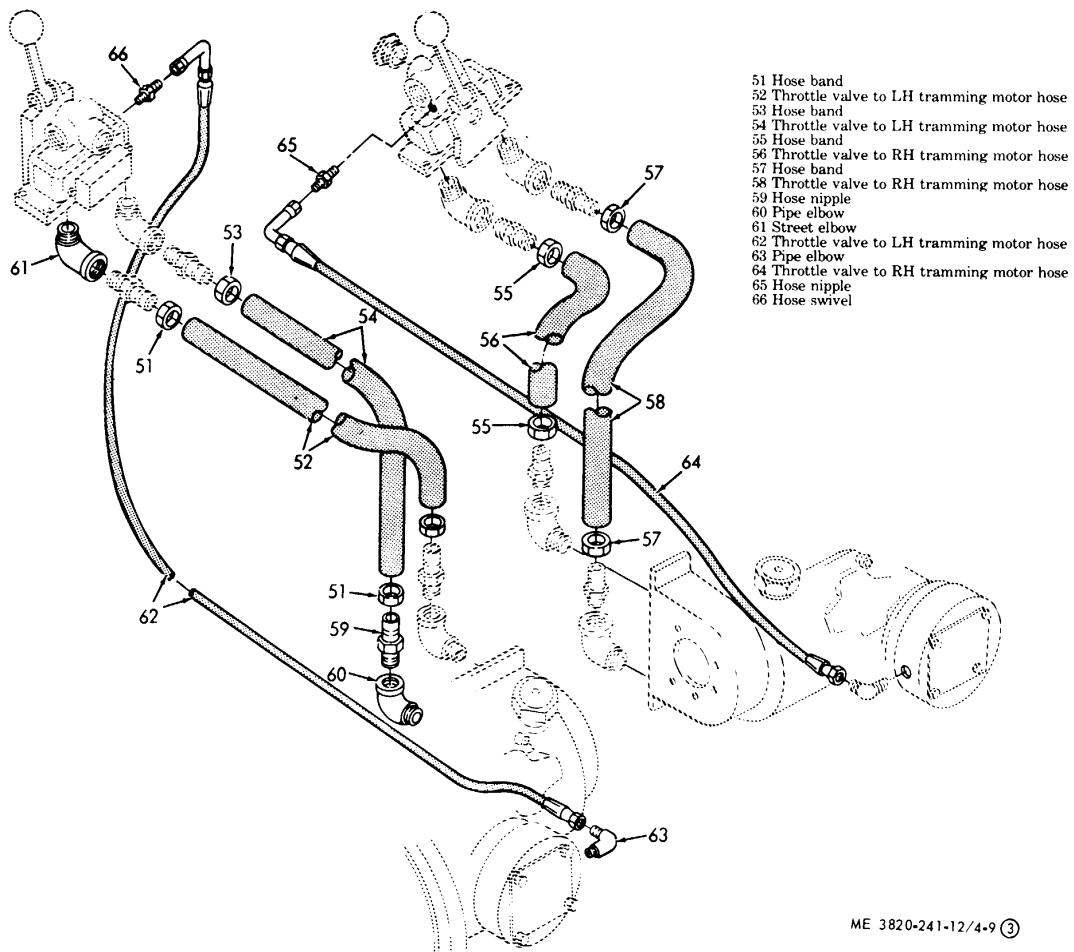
Rock drill pneumatic hoses and fittings, removal and installation (sheet 3 of 4).
